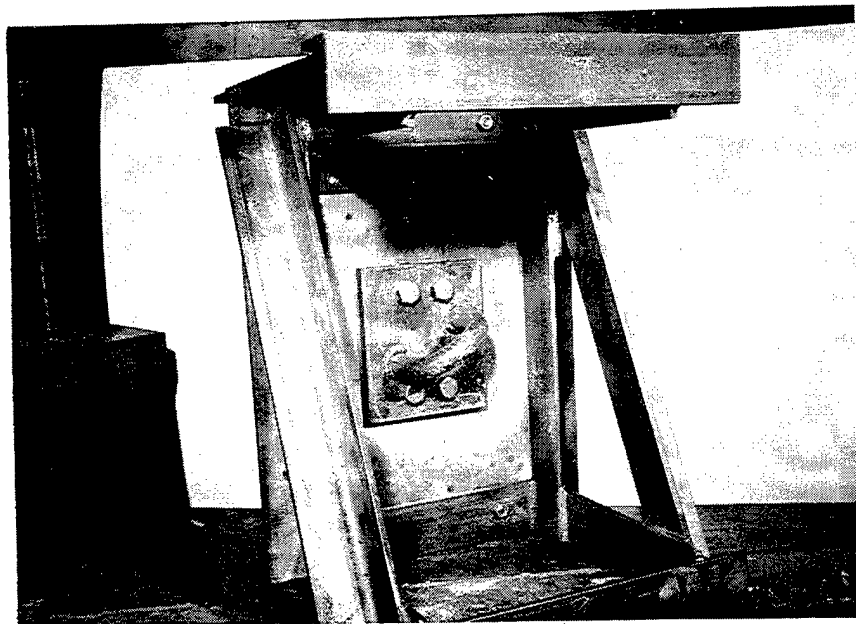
Front view of the test jig showing the new lifting device bolted to the front side of the aluminum girder test plate.
